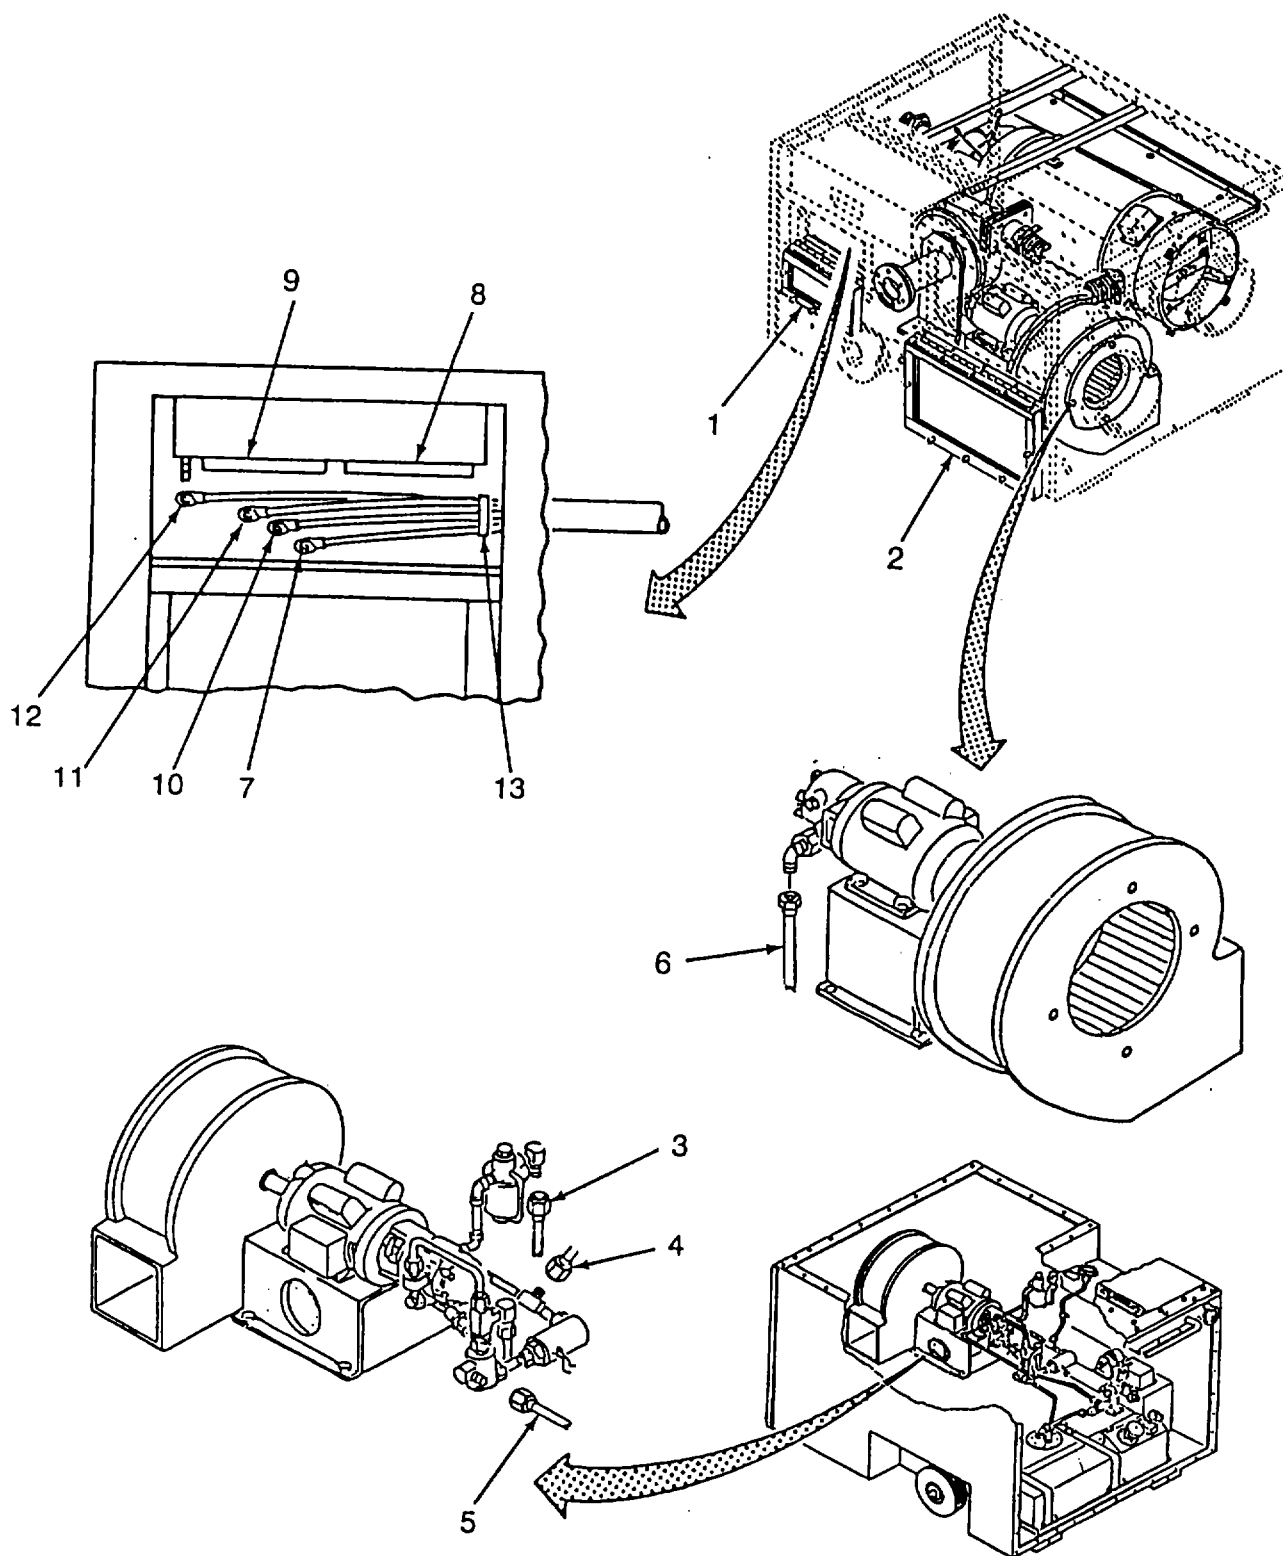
Fuel Pump and Solenoid Valve Removal (Sheet 1 of 2 )
